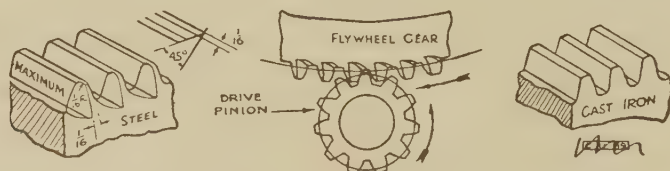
Flywheel Construction and Teeth Chamfering.
